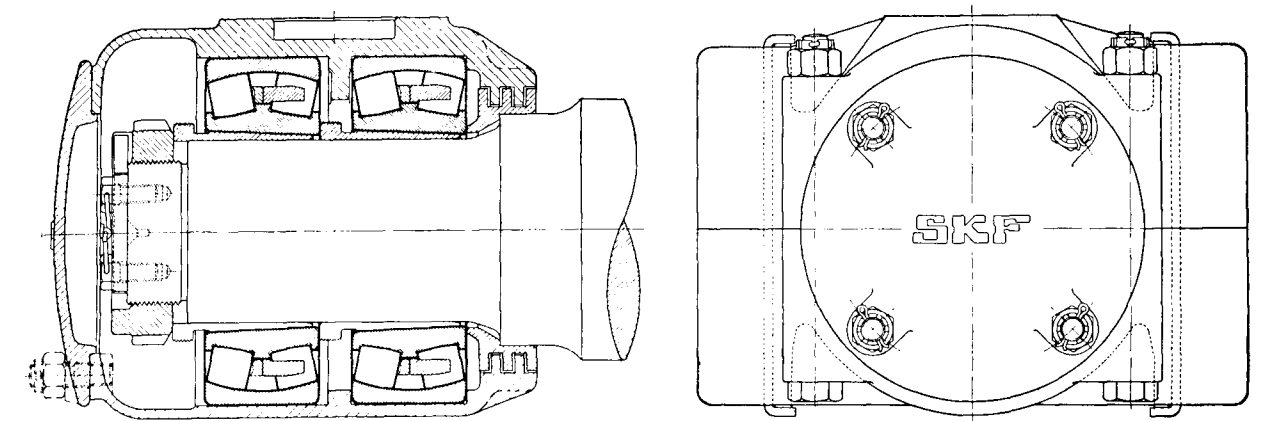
Axlebox with spherical roller bearings of type shown in Fig. 3. Split box.
